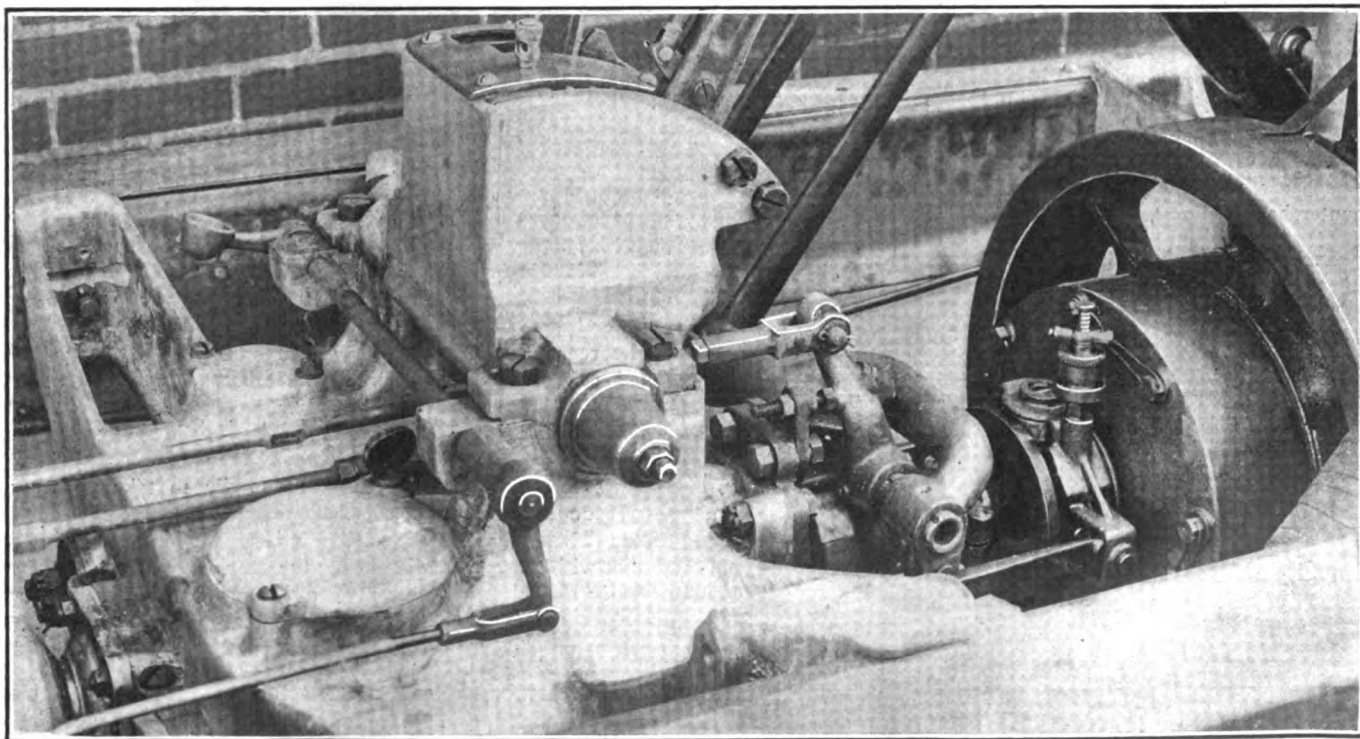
View of the gearset, control mechanism and clutch, showing oiling and adjustment points and suspension
